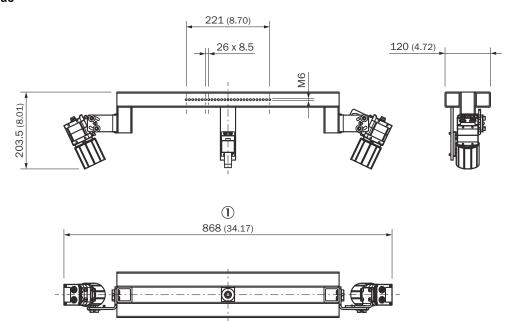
Dimensional drawings of FOS-HVS system head Duo
